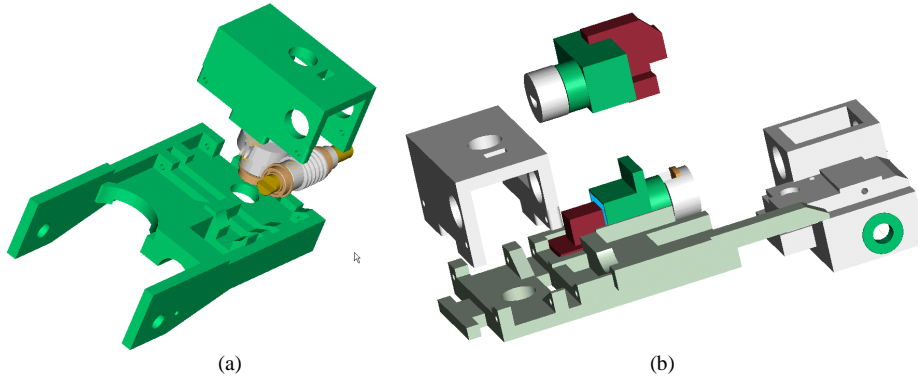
Five pieces are manufactured and assembled with mechanical components such as (a) gear structures and (b) servo motors.
